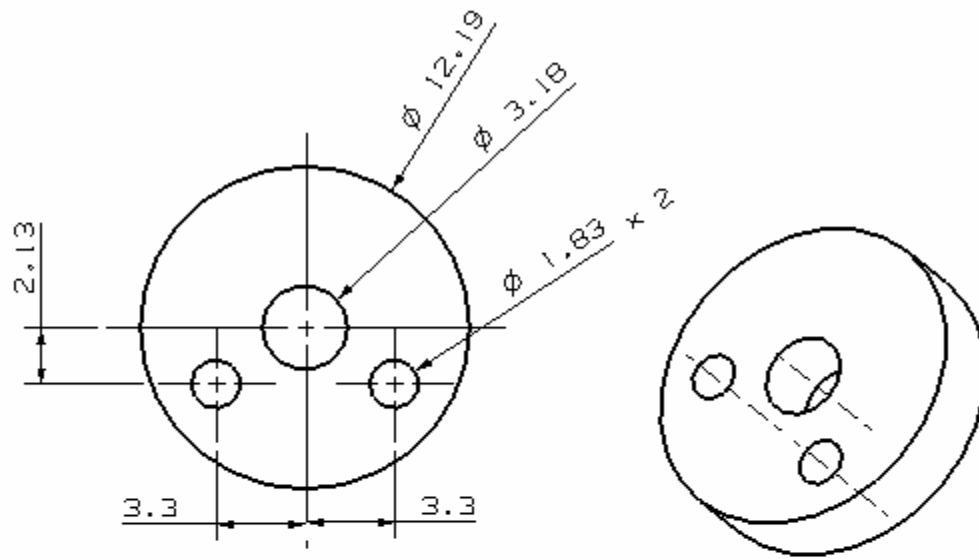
Prototype Outer Casing Dimensioned Drawings
